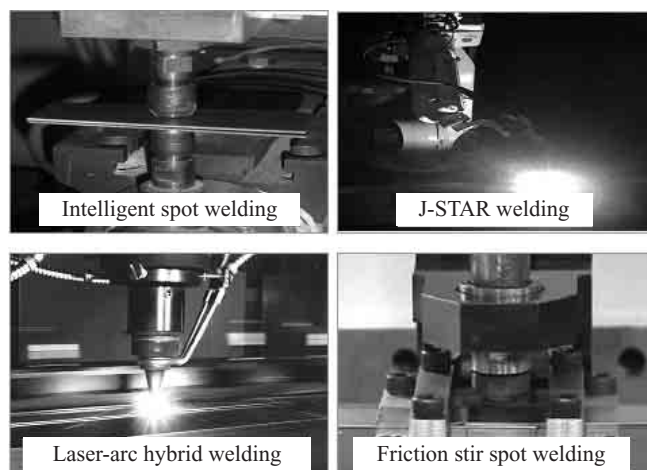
Newly developed welding technologies for assembly of automotive body
